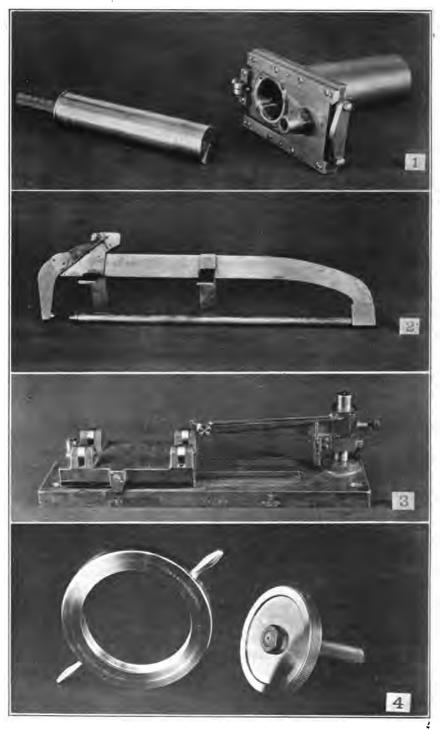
L'iscellaneous types of gauges. 1. Chamber gauge and check plug for 75-mm. gun. 2. O. O. £21 ge for base thickness of shell. 3. Frankford Arsenal concentricity gauge. 4. Screw thread gauges ring and plug type.
